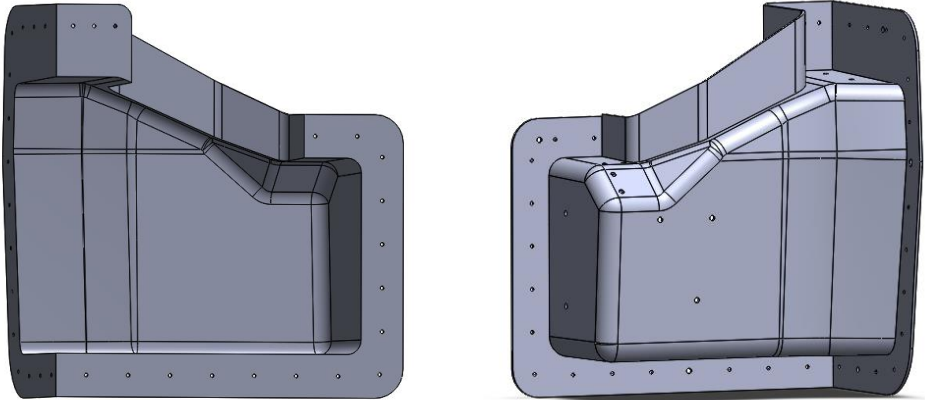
Rear RHS female mold inside view (left) and outside view (right).
